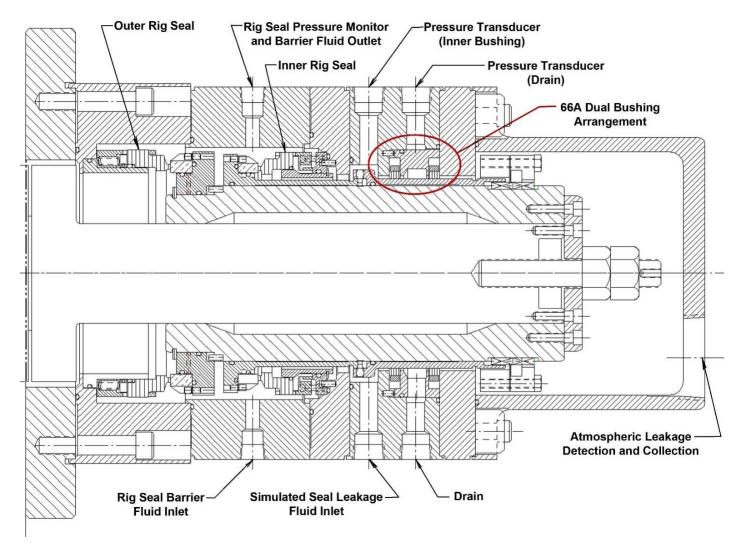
Test rig for full pressure dynamic testing of the 66A bushing arrangement
